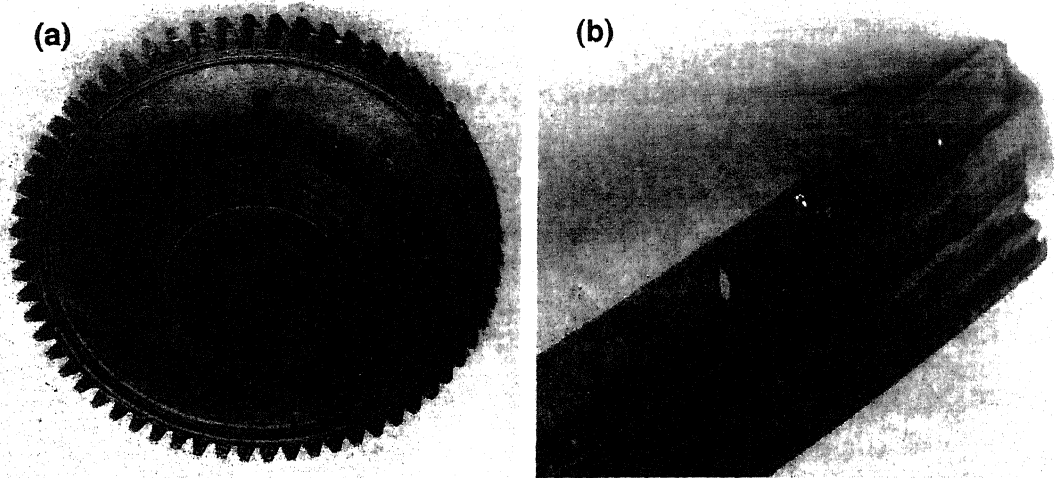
Photographs showing (a) HPTR disc and (b) a part of the detached labyrinth ring
